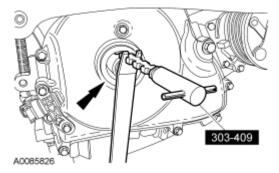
Locating Crankshaft Front Oil Seal And Special Tool (303-409) Courtesy of FORD MOTOR CO.
